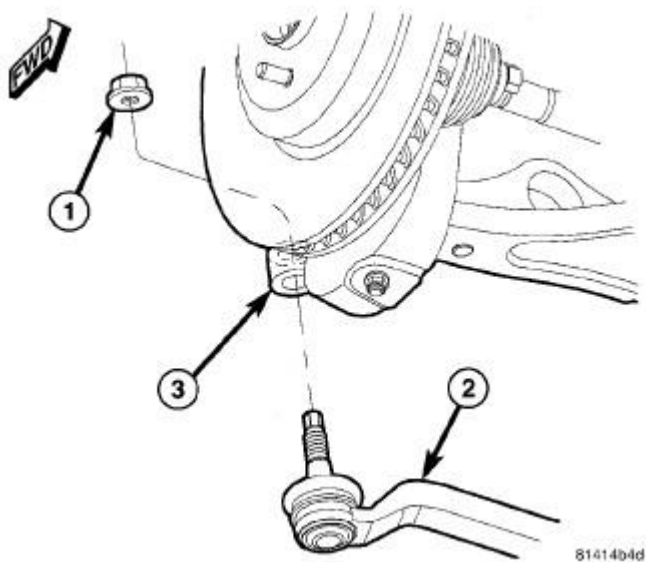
TIE ROD ATTACHMENT AT KNUCKLE
